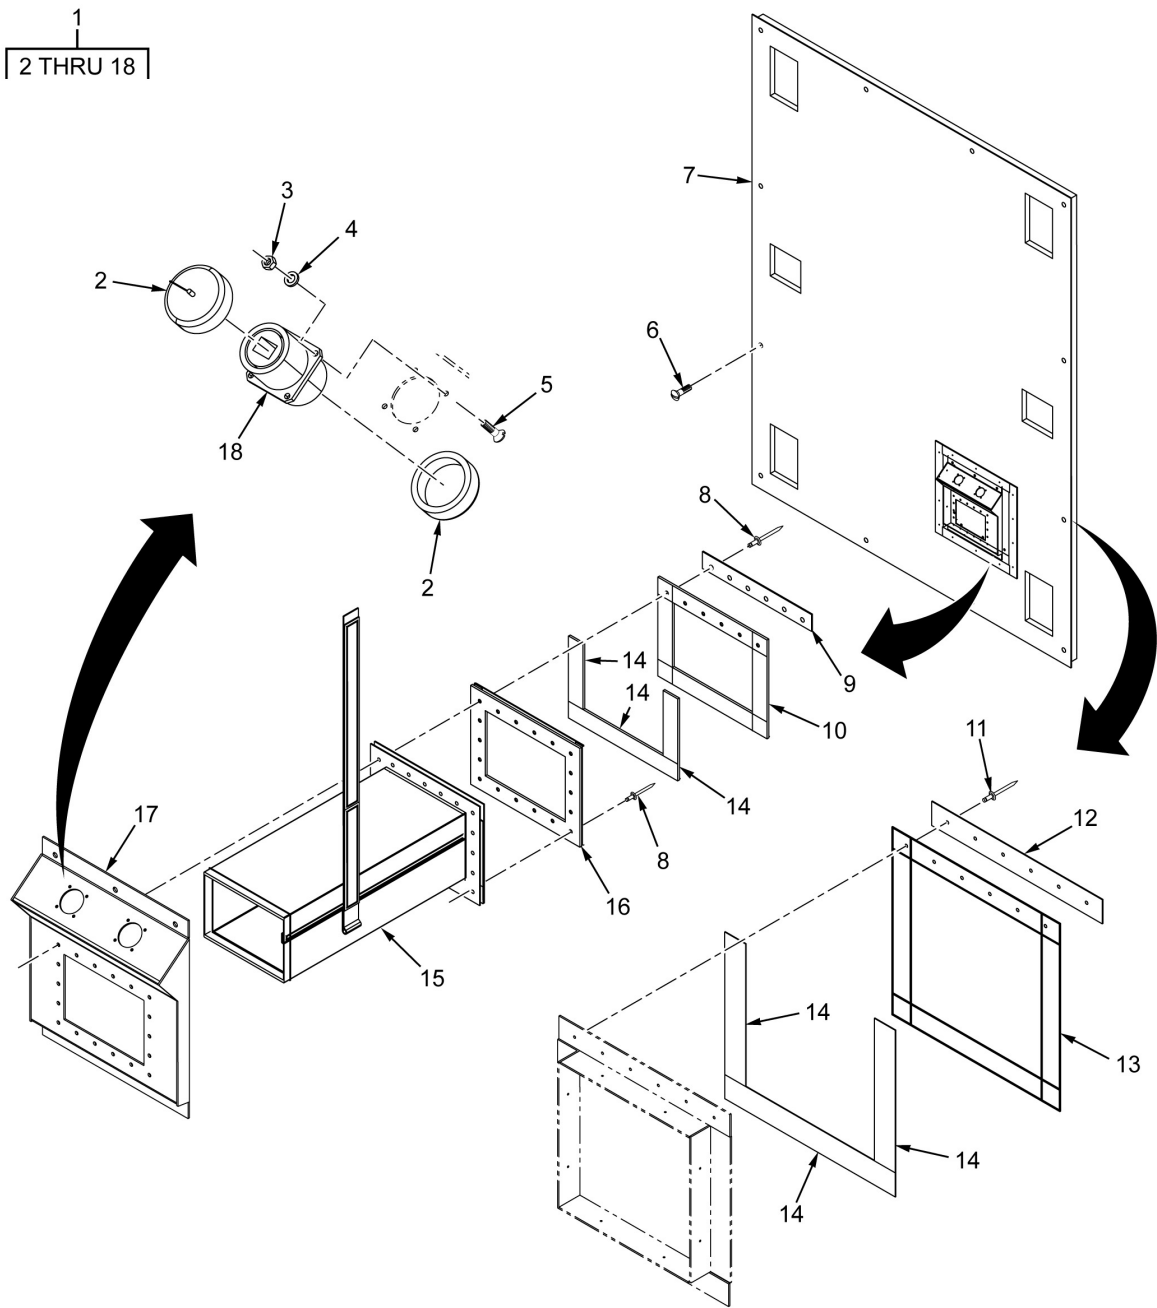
MODIFIED SHELTER WALLS (Sheet 2 of 2)
